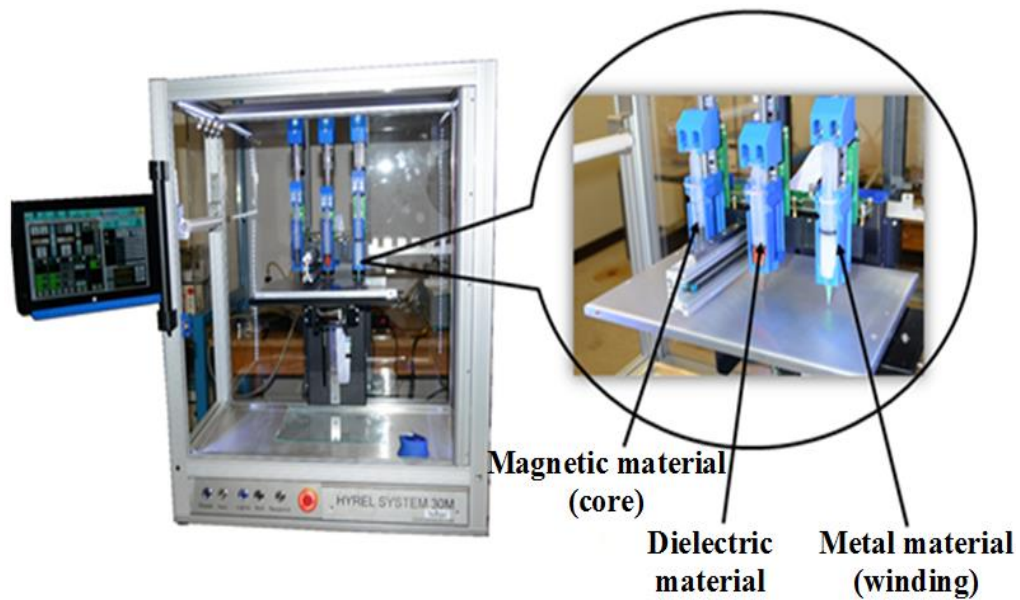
Hyrel 30M multi-extruder paste-extrusion 3D printer with syringe dispensing heads.
